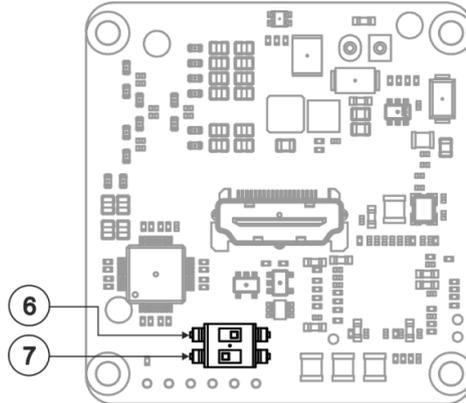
WP-871xr Line Transmitter Wall-plate – Front Panel Before Assembly
